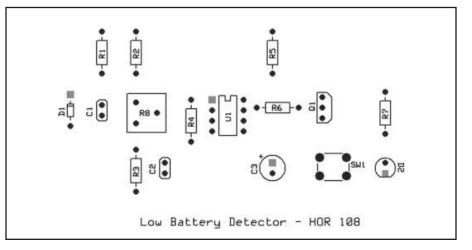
PCB layout begins by selecting a component outline for each required component on the layout. At this stage exact placement is not important.
